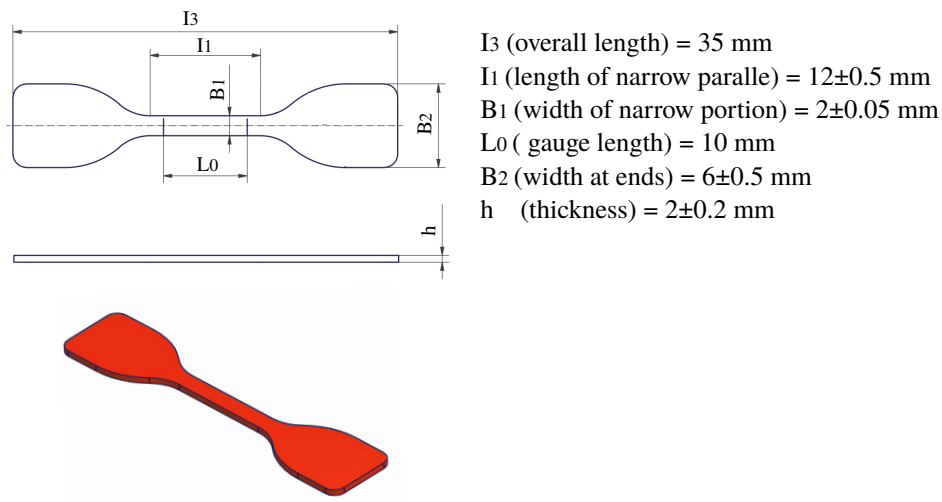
specimen dimensions for tensile test bar for rubbers and elastomer samples in very small size.
